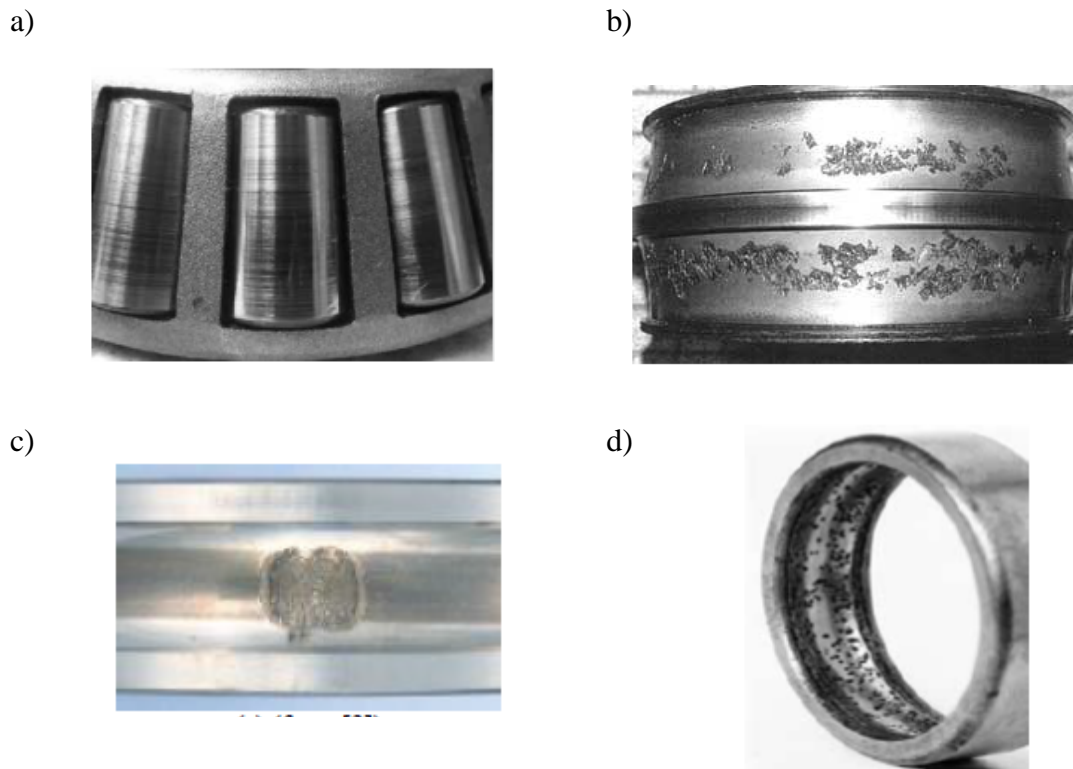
6 Bearing defects a) Wear marks due to foreign matter. b)Fatigue spall on bearing inner race c)flaking d) Corrosion
